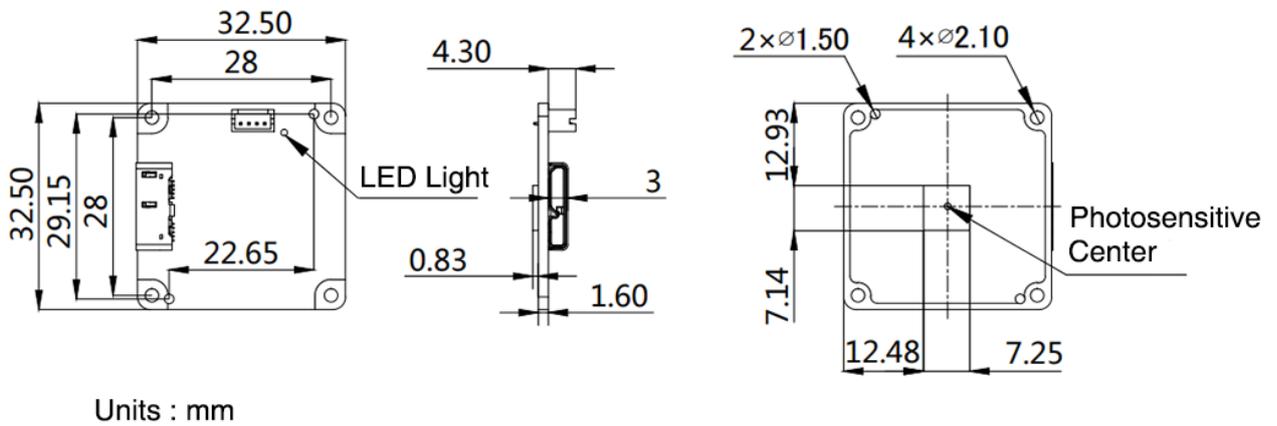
VEN-505-36U3M/C-M06 mechanical dimensions
